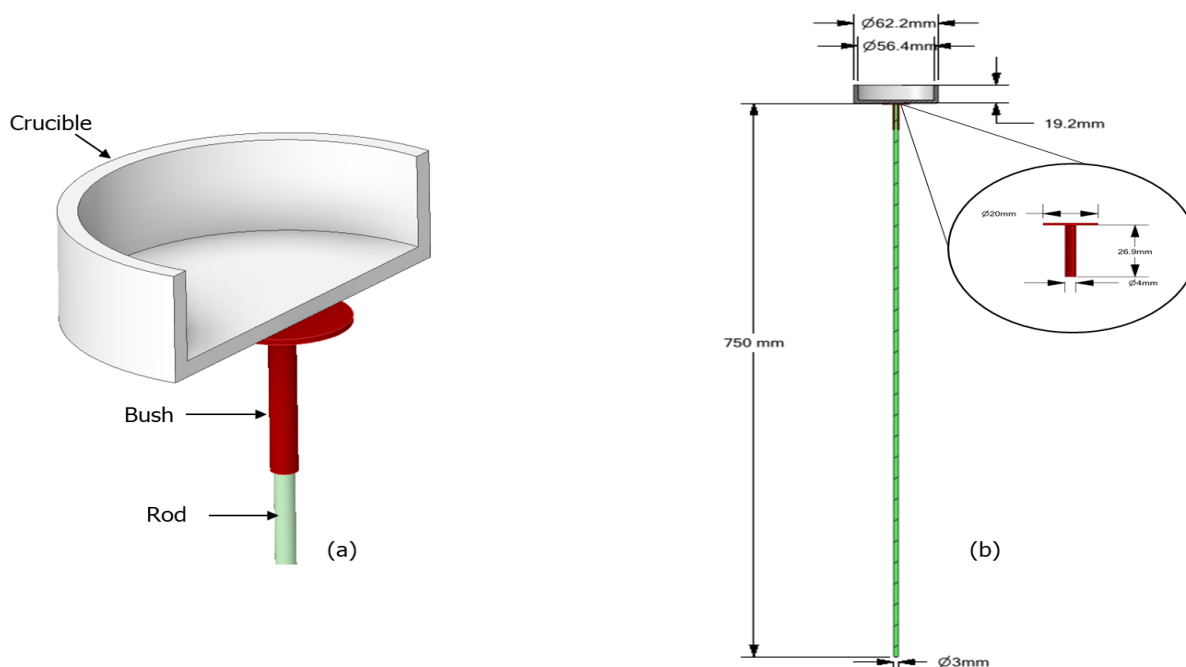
Char sample container of the Macro-TGA using 3 mm rod: crucible, bush and rod; setup (a) and detailed dimensions (b).
